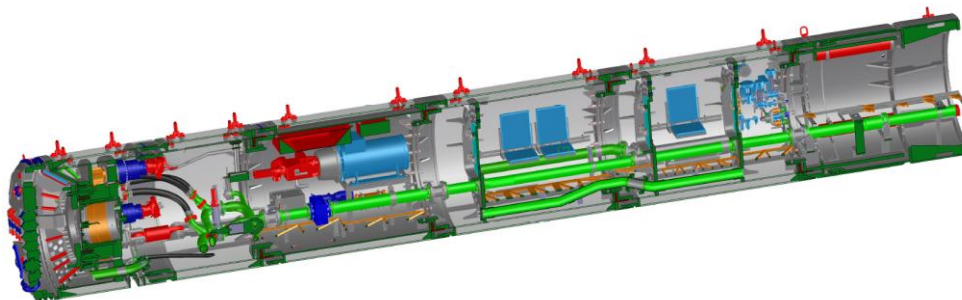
The Herrenknecht AVN1800TB Slurry Tunnel Boring Machine with Extension Kit OD2220
